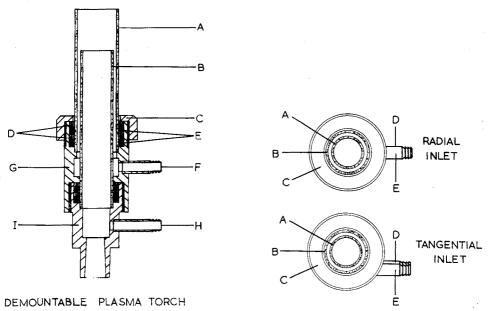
Demountable plasma torch. (A) Outer silica tube; (B) inner silica tube; (C) locking cap; (D) spacer ring; (E) rubber "O" ring; (F) coolant gas inlet; (G) upper body; (H) plasma gas inlet; (I) lower body with B14 socket.
